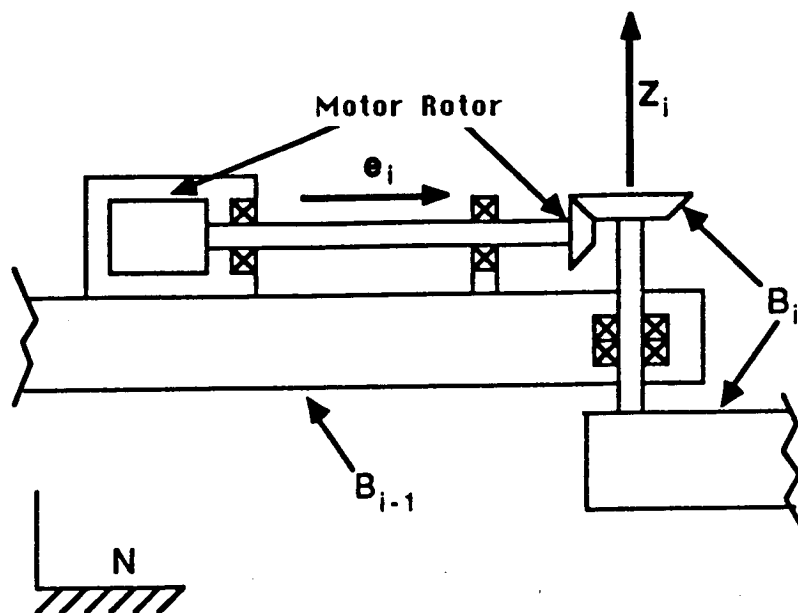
Motor Rotor and Gear Reduction Mechanism
